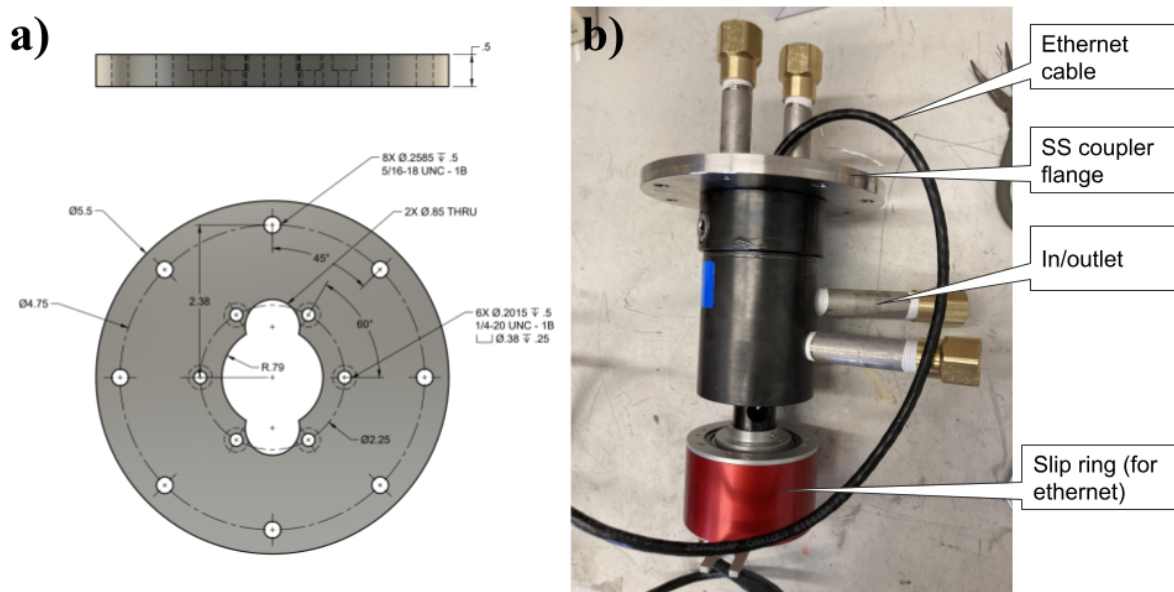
Rotary union. a) Stainless steel coupler flange design. b) Rotary union with an Ethernet slip-ring pathway.
